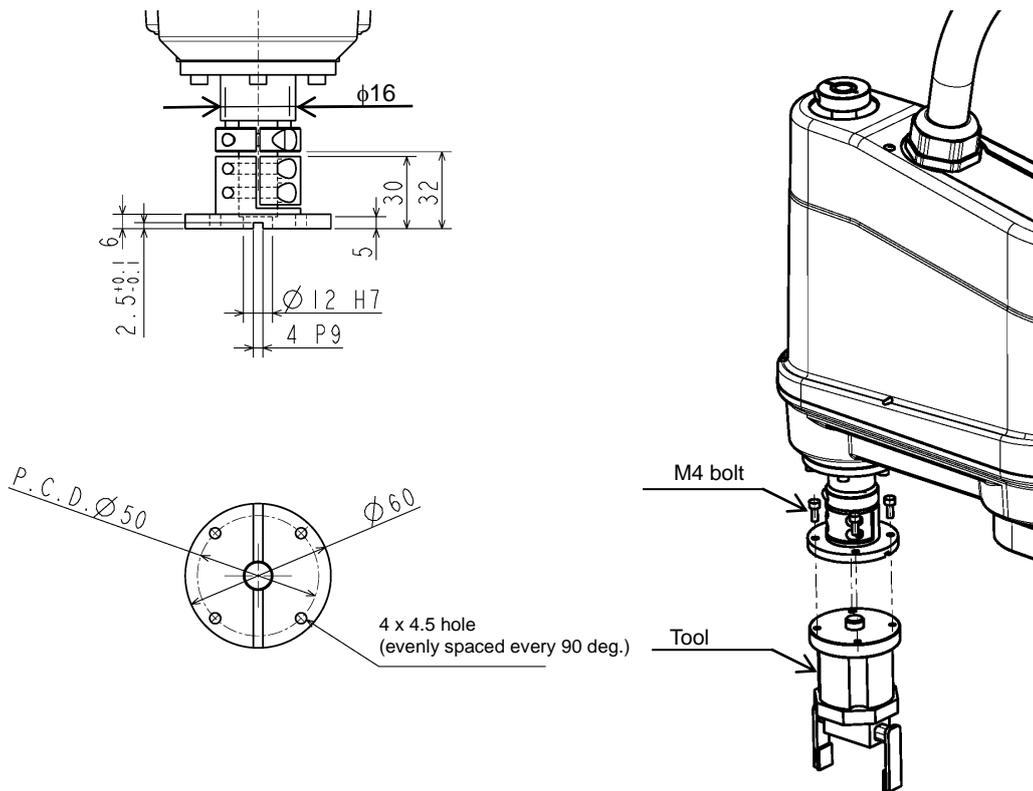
Tool mounting dimensions (KHL-300 and KHL-400)
